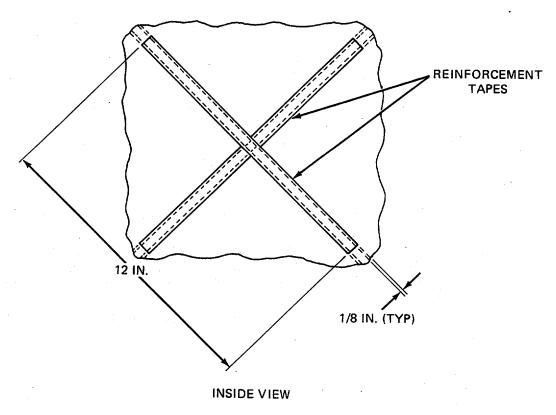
Crown Inside Reinforcement Tape Replacement Details.
